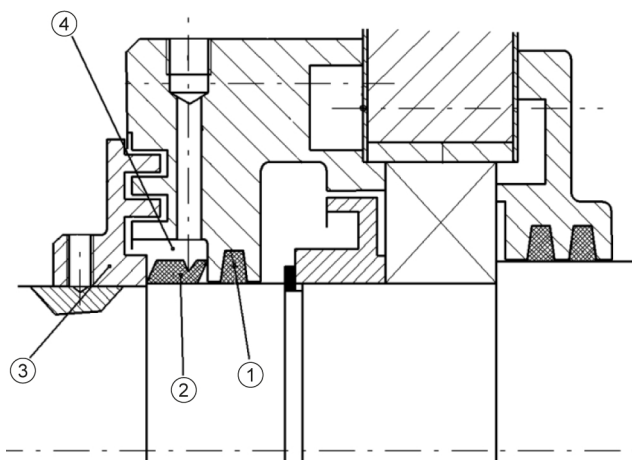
Disassembling the labyrinth sealing ring (schematic diagram)
